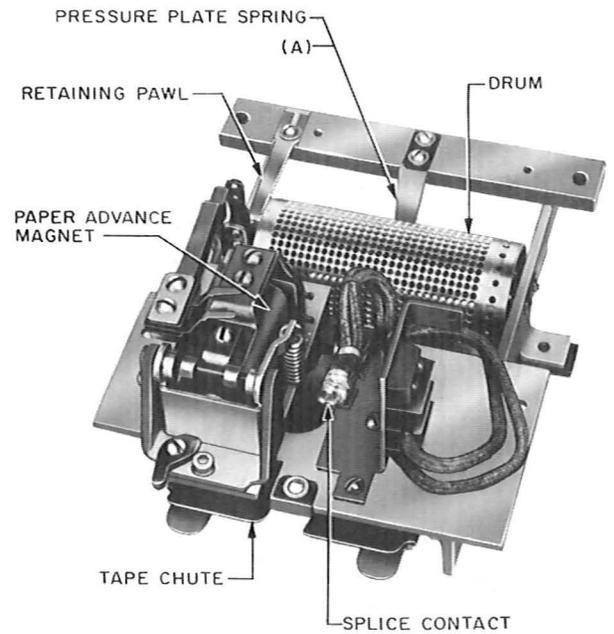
Cradle Assembly — Bottom View — D-176283 Perforator
